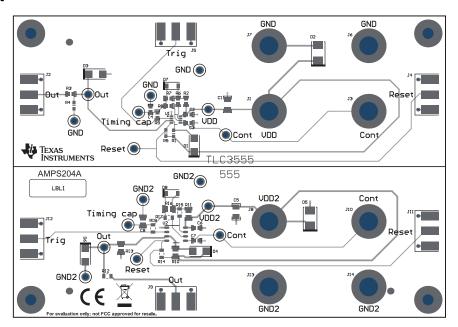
TLC3555EVM PCB Layout Top View Composite
